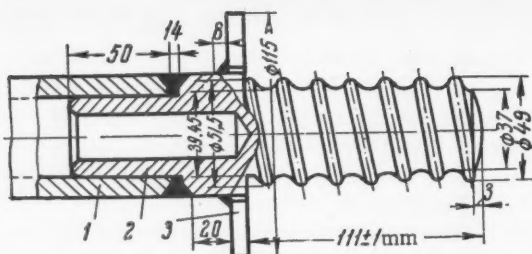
Lower part of cooled stopper rod: 1) Tube of low-carbon steel; 2) pressed screwthreaded part; 3) supporting disk.
